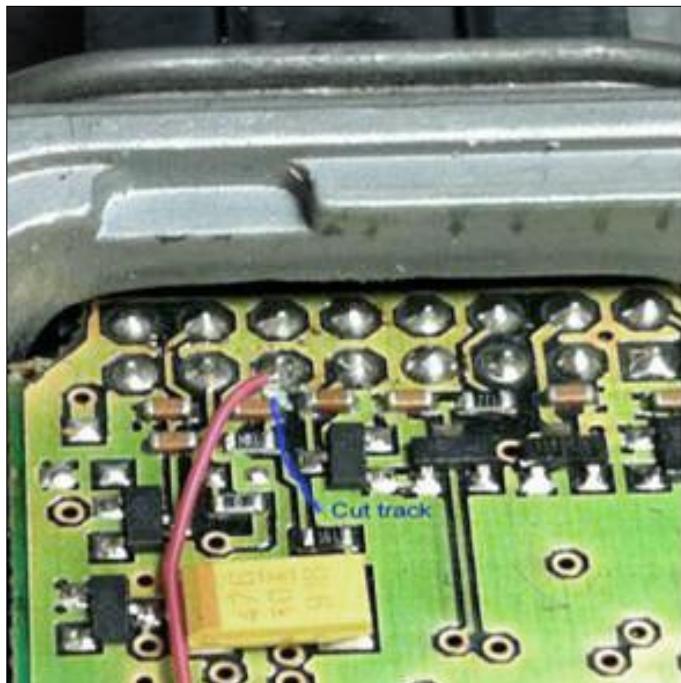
cut track adjacent to pin 11 of the accessory connector at the back of the GM350 and solder a wire directly to the pin.
